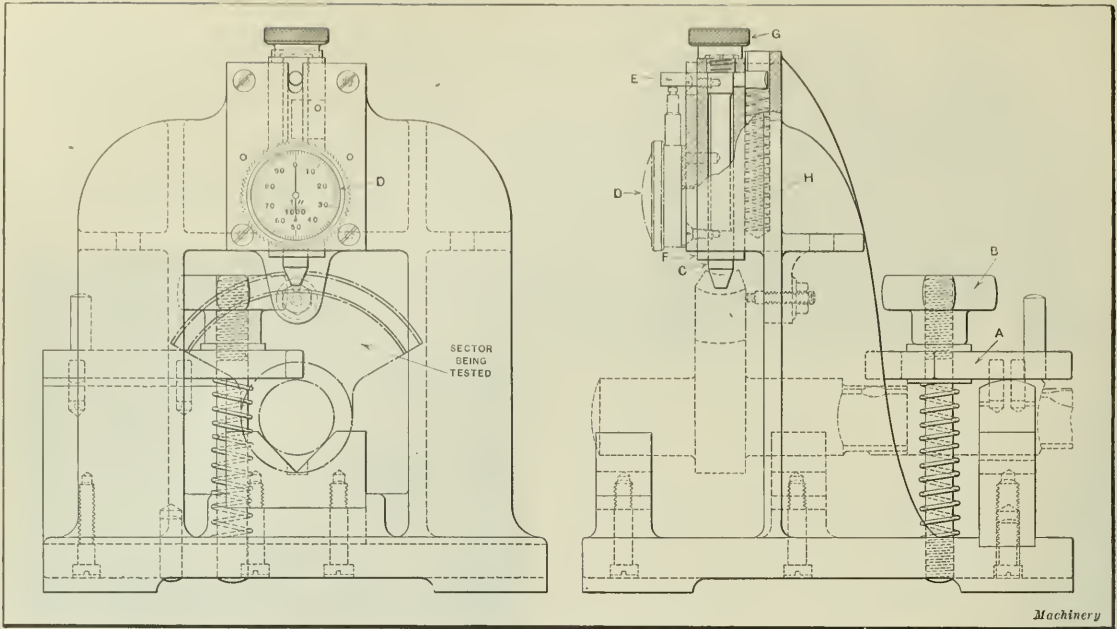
Fixture for testing Eccentricity of Steering Gear Sector
